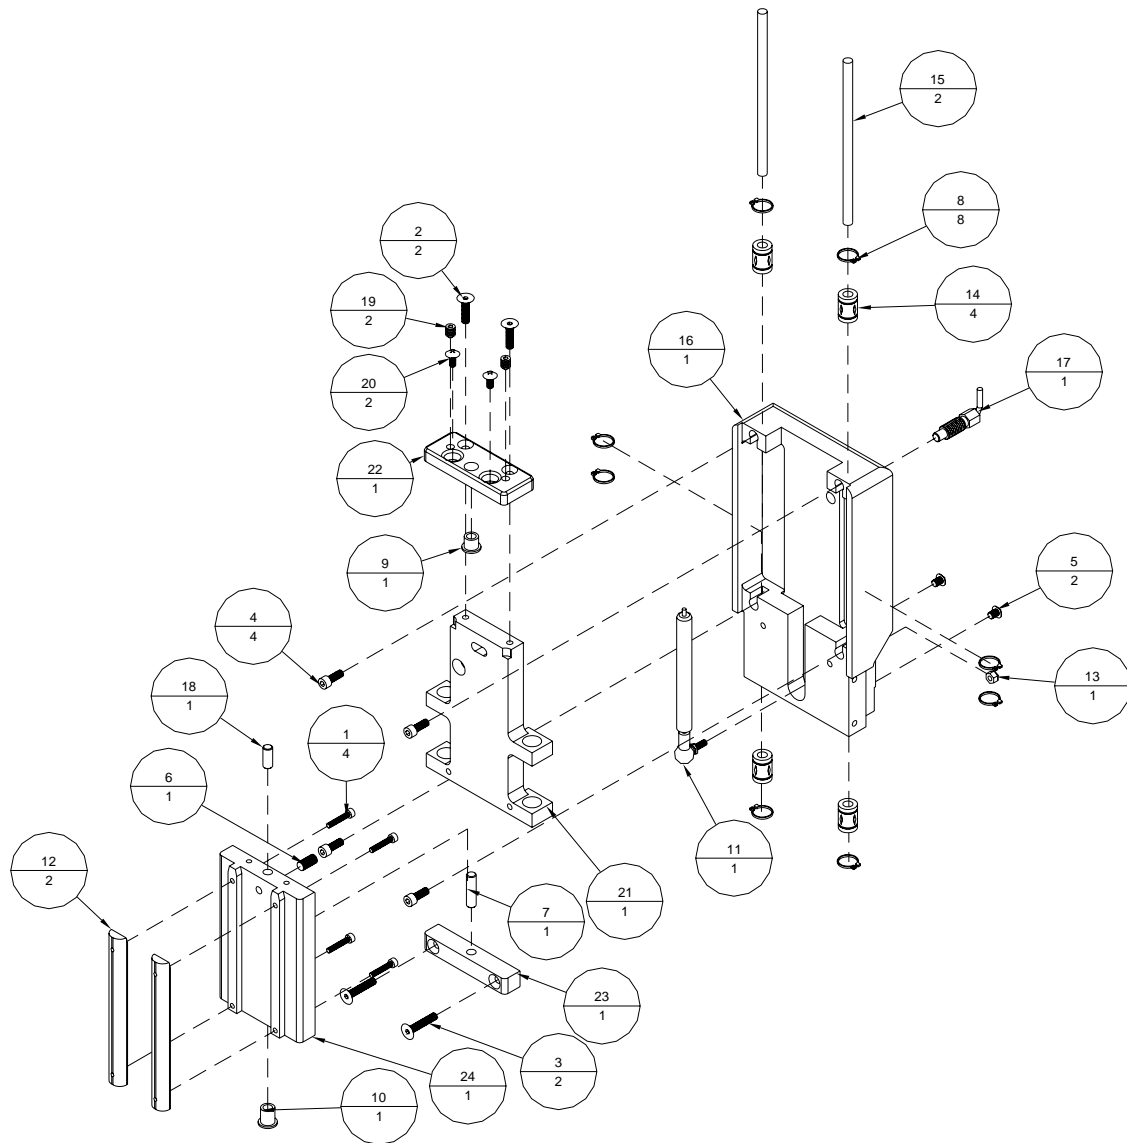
Printhead Support Assembly, Angle (9104008A)
